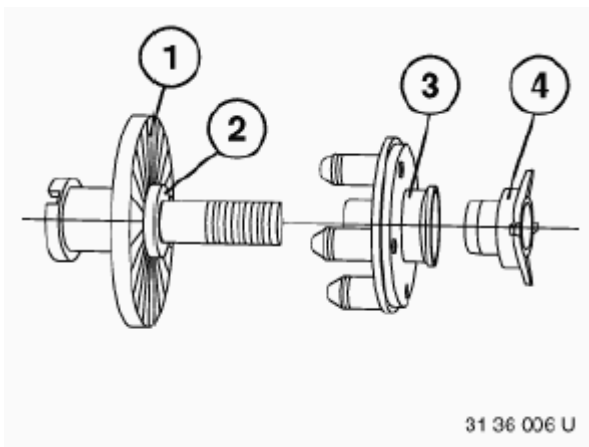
Basic Flange, Wheel Centering Element And Clamping Nut
